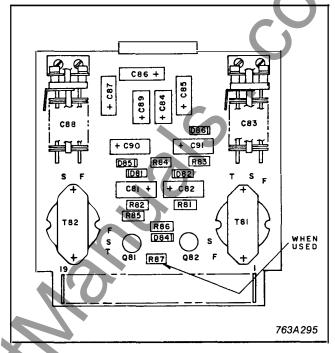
Component Locations on Discriminator Printed Circuit Board.
